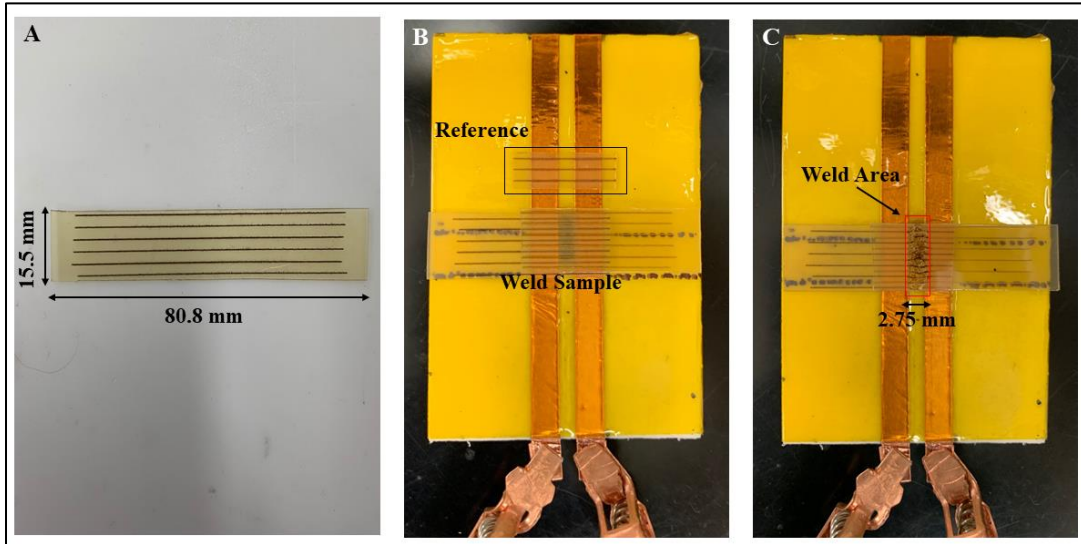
(A) PEI film that has been patterned with LIG stripes (5% laser power, 10% etch speed, 1000 PPI). (B) The weld sample is assembled after determining that the bottom coupon and the reference are heating at the same rate. (C) The welded sample has a weld area that is localized between the copper strips and spans over the length of the sample.
